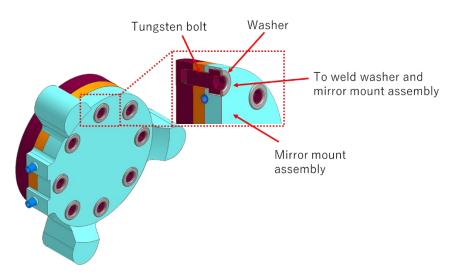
Assembly of tungsten mirror and mirror mount assembly
